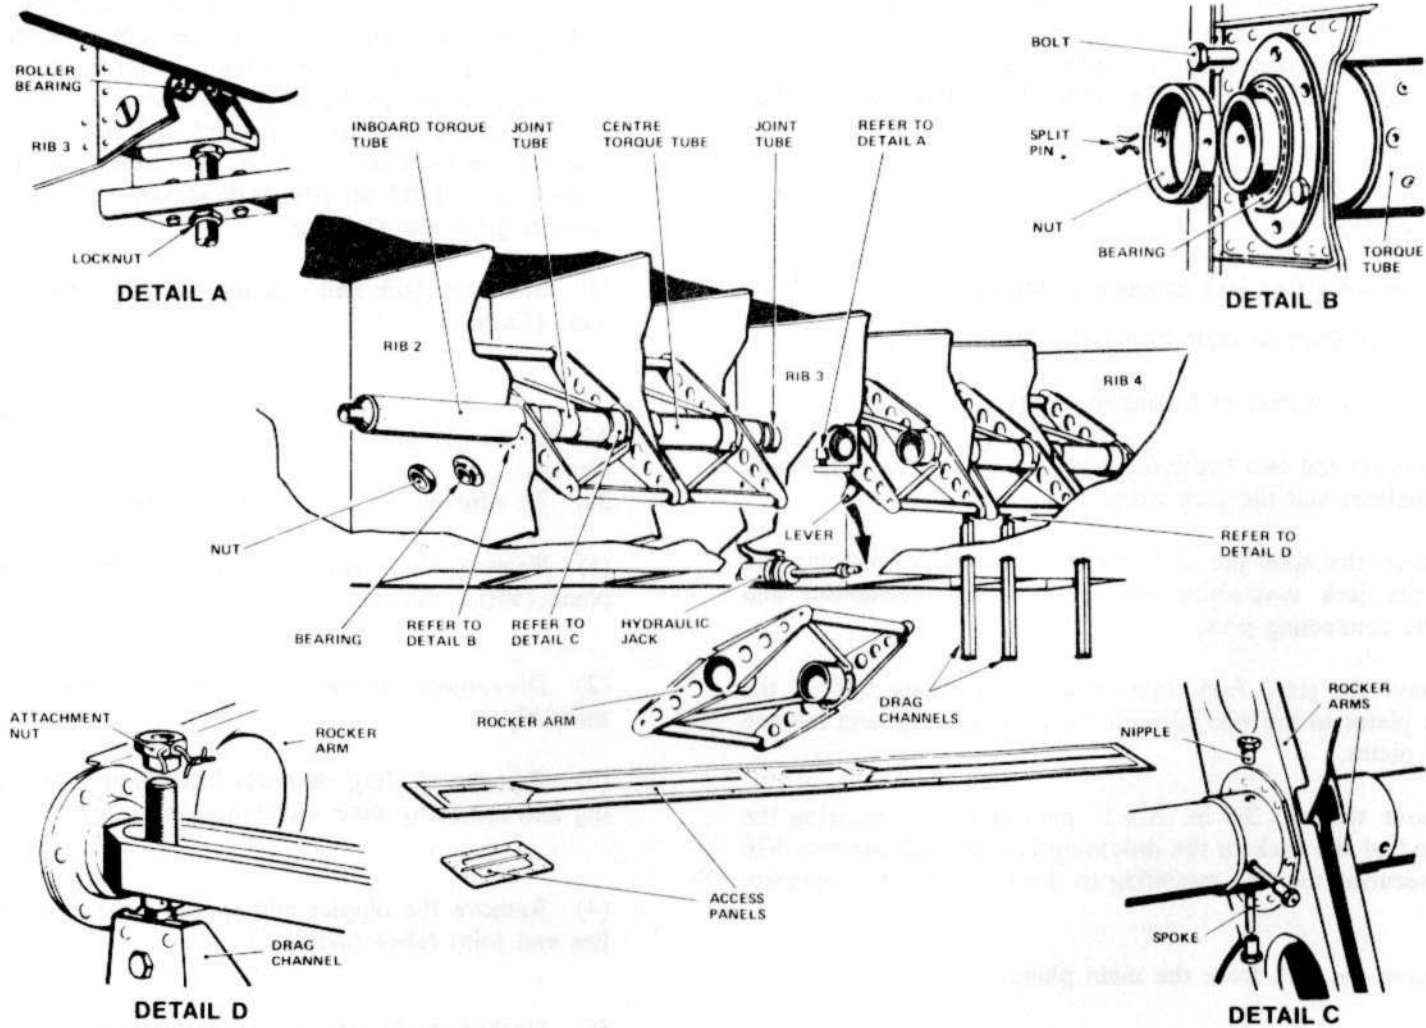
AIR BRAKES - REMOVAL AND ASSEMBLY
